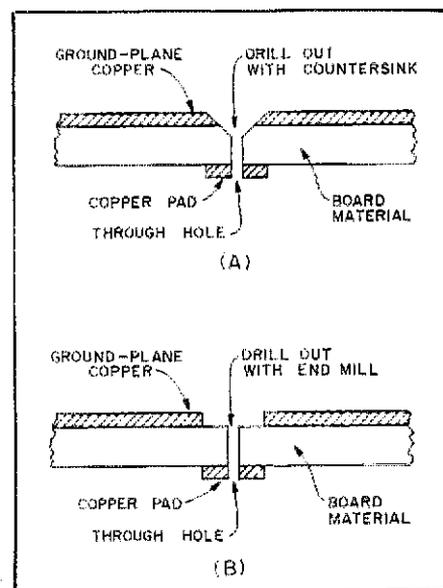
When you use one side of a double-sided PC board as a groundplane, the ground-plane copper must be removed around each through-hole. You can remove the foil with a drill or countersink (A), but overdrilling with these tools can easily ruin the board. An end mill allows removal of foil with little or no damage to the underlying board material (B). Dick Edwin suggests using a homemade end mill; see text.
